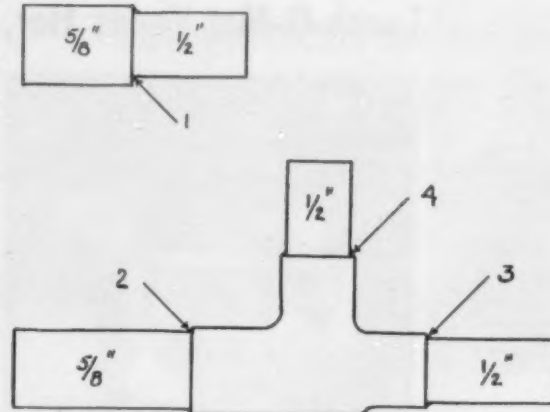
Swaged tee with hard copper tubes soldered with 95-5 solder.
